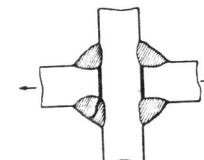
Transverse load-carrying fillet weld (crack initiation at the weld root).
